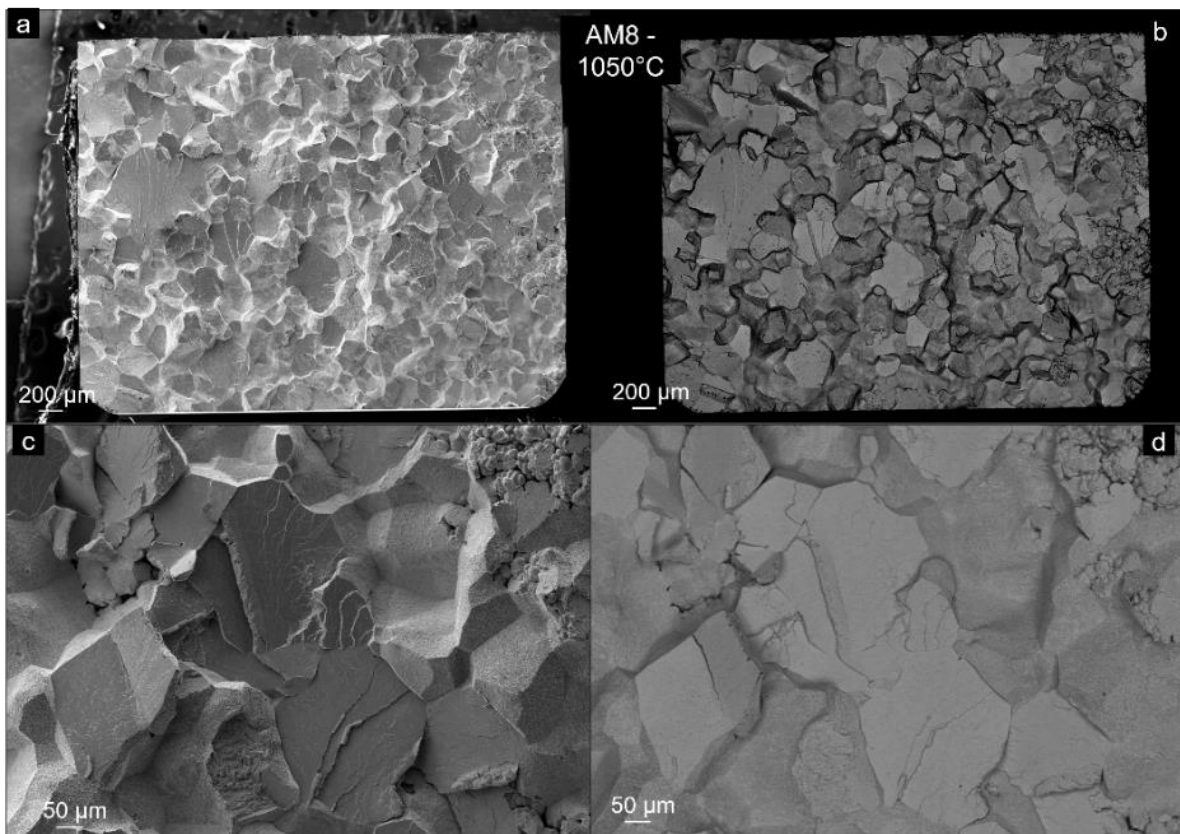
SEM micrographs of fracture surfaces of AM8 bending specimens. The compression side is upwards, while the tension side is downwards and has grinded edges. a,b) Typical fracture surface morphology using SE and BSE detectors, respectively. c,d) Enlarged view of the in SE and BSE modes.
